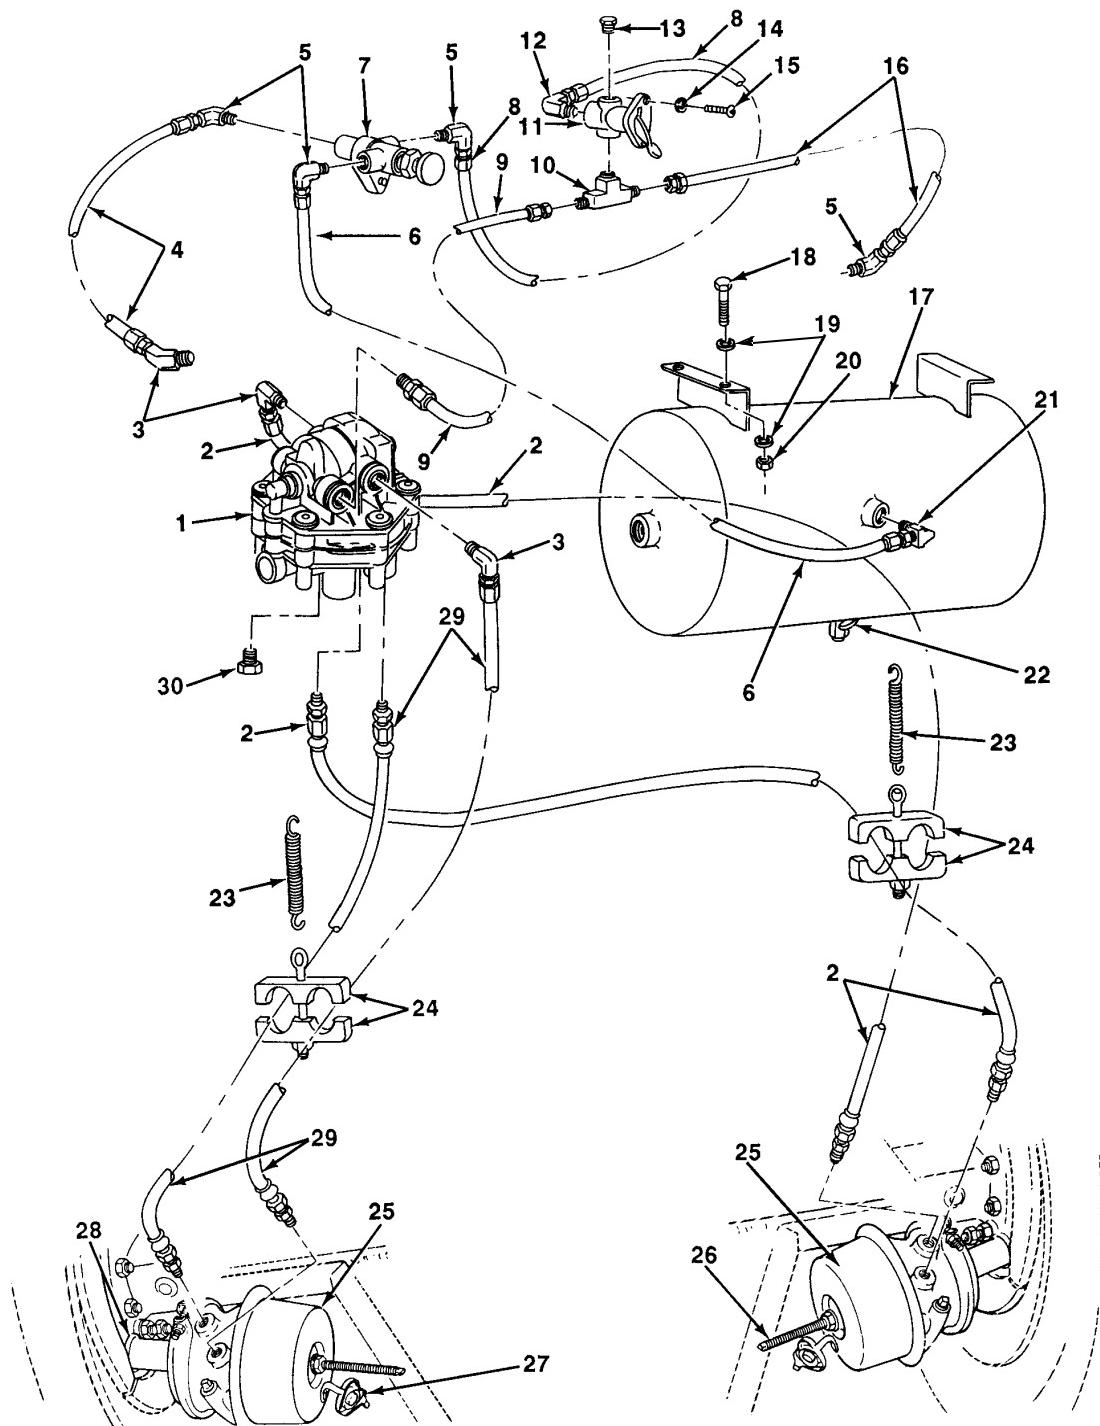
Airbrake Chambers, Lines, and Fittings, Rear.
